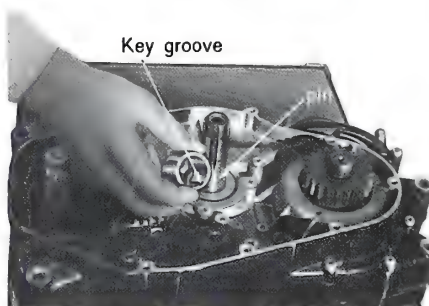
Inserting clutch housing spacer knock pin
